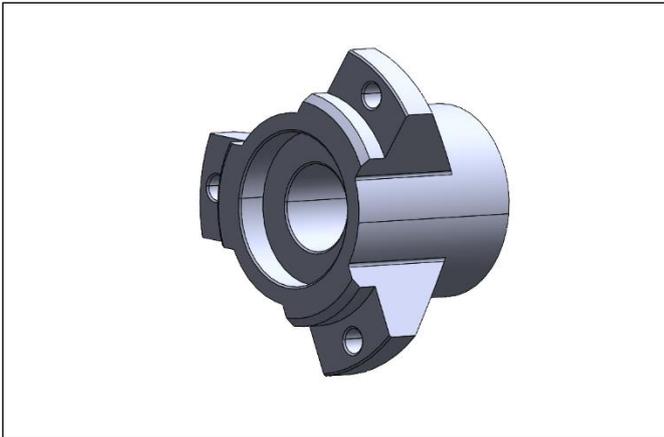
Isometric View of the Electric Go-Kart Front Wheel Hub Geometry.
